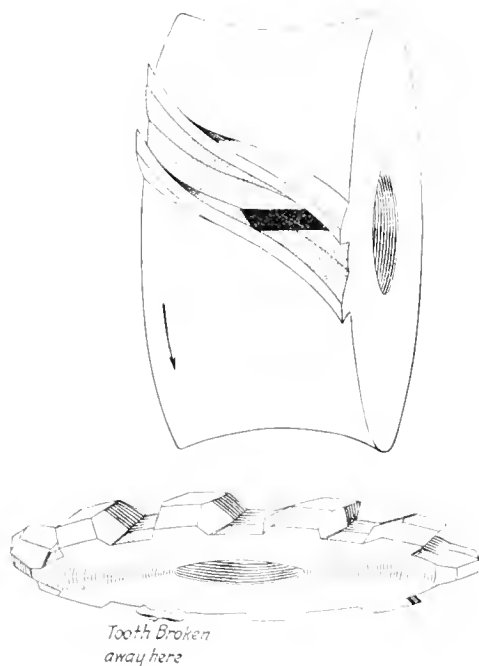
DIAGRAM SHOWING RELATION BETWEEN SKEW-GEAR CYLINDER WHEEL AND PISTON WHEEL
